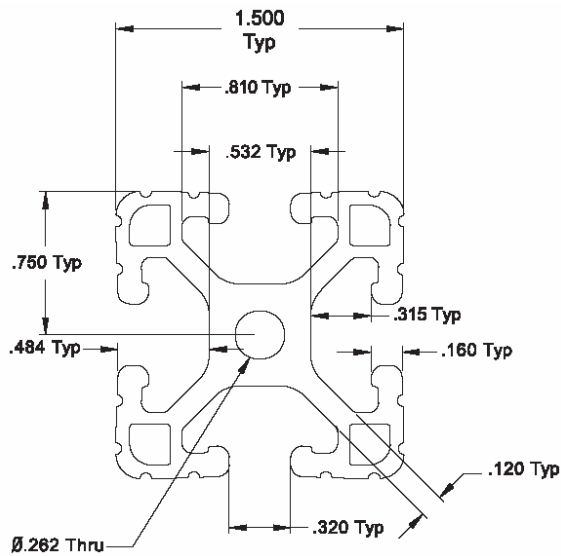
Cross sectional view of the 8020 extruded aluminum pieces that we will use to build the casing.
